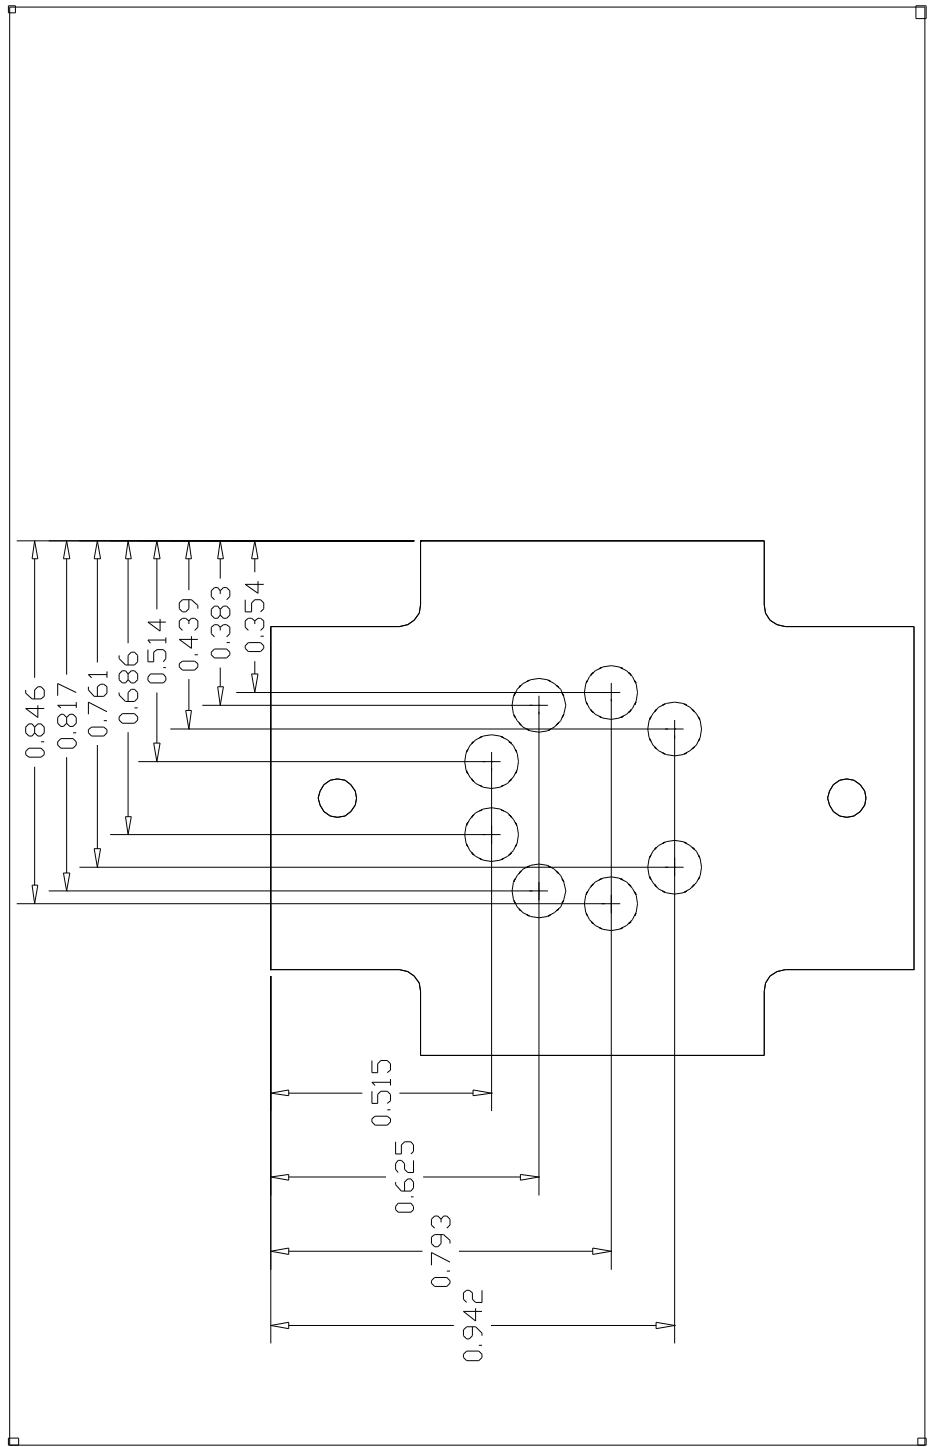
Dimensioned adapter for TO3 laser package. Dimensions are in inches.
